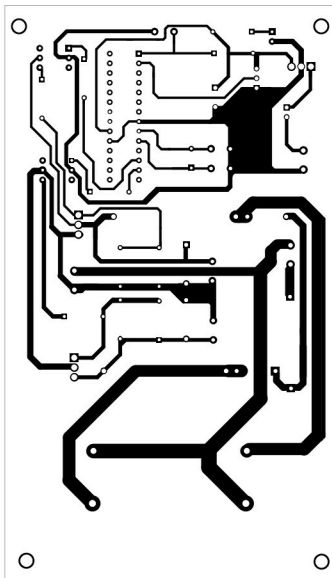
Actual-size PCB layout of the fan speed increasing regulator
